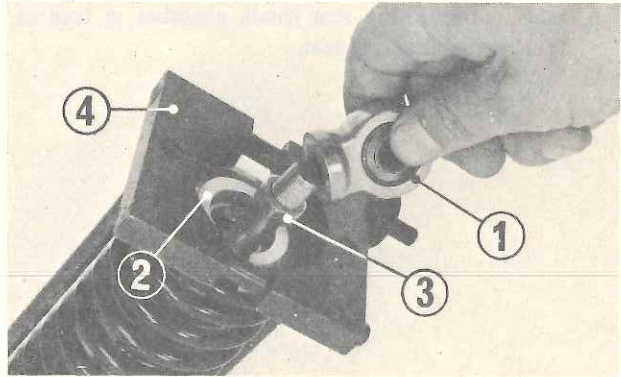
(1) Upper joint (4) Rear cushion disassembling tool
